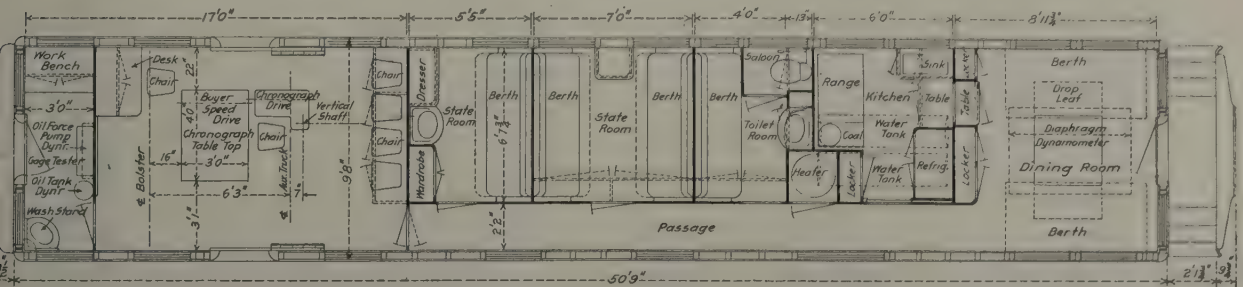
Floor Plan of Baltimore & Ohio Dynamometer Car.
